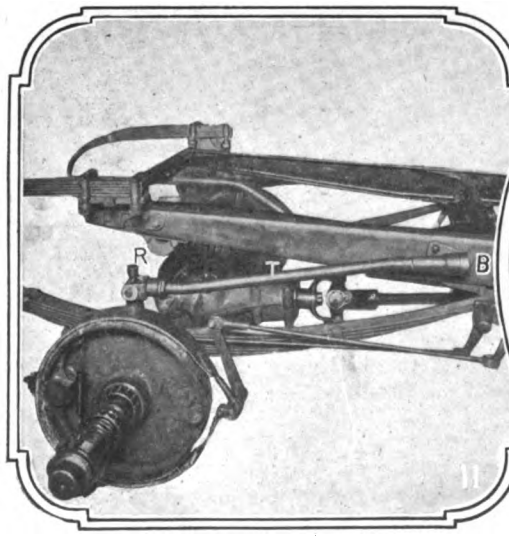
View of the brakes of the Maxwell Special with the wheel removed showing the jackshaft, torque rod and spring suspension
